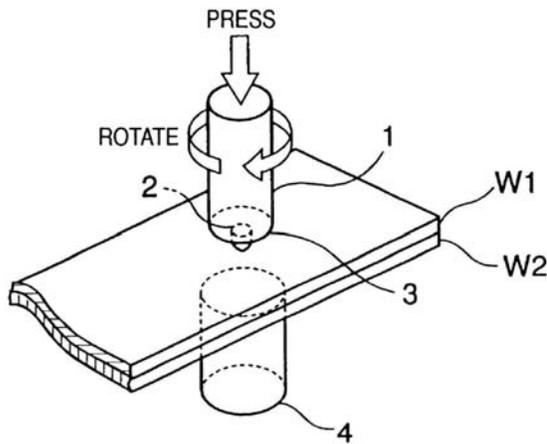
Spot friction welding process, with a rotational pin stirring from the top and a stationary anvil at the bottom. [1]
